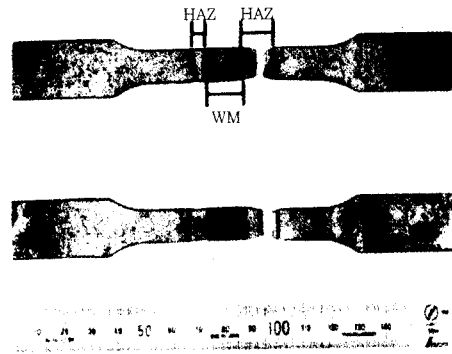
Fracture appearance of welded-joint tensile specimens
